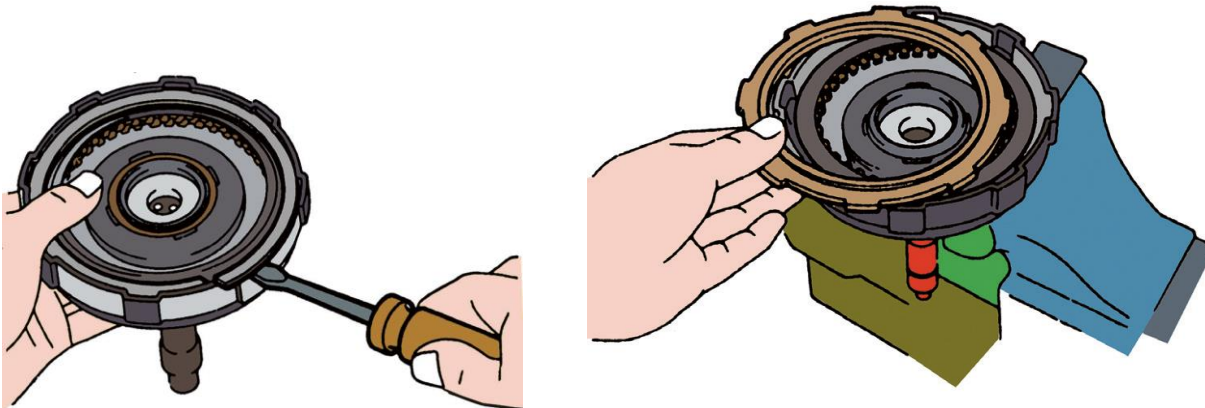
Remove the snapping and then the pressure plate and clutch plates.
